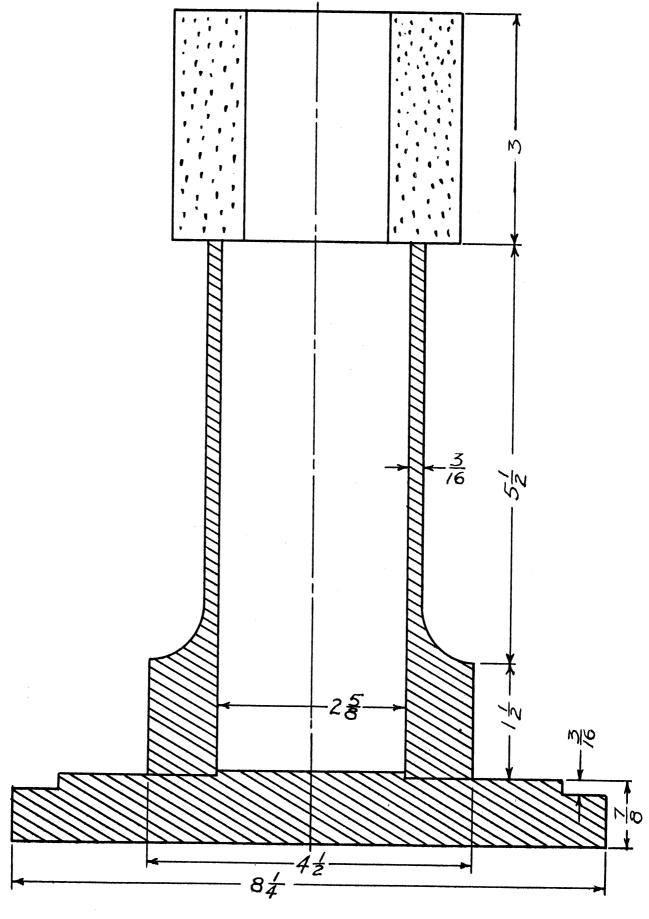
Drawing of copper ingot mold and hot top arrangement for casting approximately 11 pounds of nickel-base alloy.
